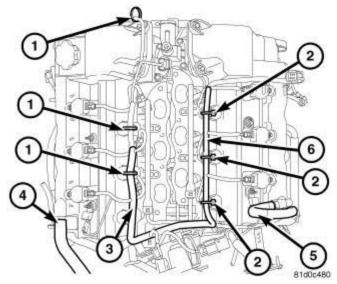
Engine Harness Retaining Clips Courtesy of CHRYSLER LLC
